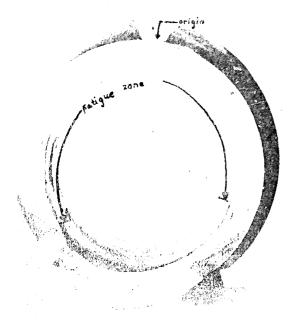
A freeting corrosion-failure failure of a propeller blade. Fracture surface showing orgin and extent of crack propagation.
